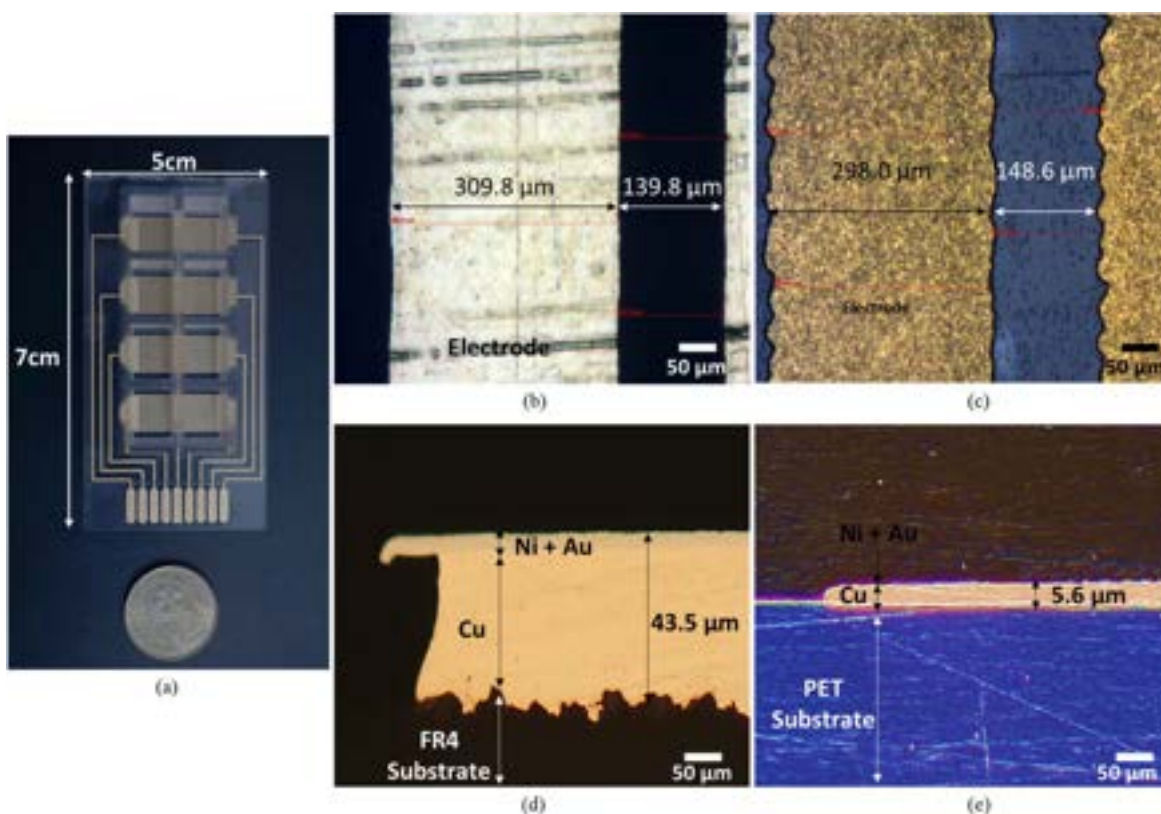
Characterization of electrodes dimension. (a) Dimension of sensor design. The image shown is for the PET sensor. PCB sensor has the same dimension of electrode configuration but a slightly larger substrate size (b) Micrograph image of a single PCB electrode finger at 10× magnification. The measured dimension of one electrode finger is $309.8 \pm 1.2 \mu\text{m}$ width ($n = 4$) and $139.8 \pm 3.5 \mu\text{m}$ spacing ($n = 4$). (c) Micrograph image of single PET electrode finger at 10× magnification. The measured dimension of one electrode finger is $298 \pm 6.3 \mu\text{m}$ width ($n = 4$) and $148.6 \pm 5.1 \mu\text{m}$ spacing ($n = 4$). (d) Cross-sectional image of PCB electrode at 2000× magnification. Different Cu and Ni layers could be observed from the color contrast between the two metals. (e) Cross-sectional image of PET electrode at 2000× magnification. Different Cu and Ni layers could be observed from the color contrast between the two metals. Images have been digitally enhanced (color saturation 200%) to aid visualization. All the microscopic images are in the scale bars of 50 μm range.
